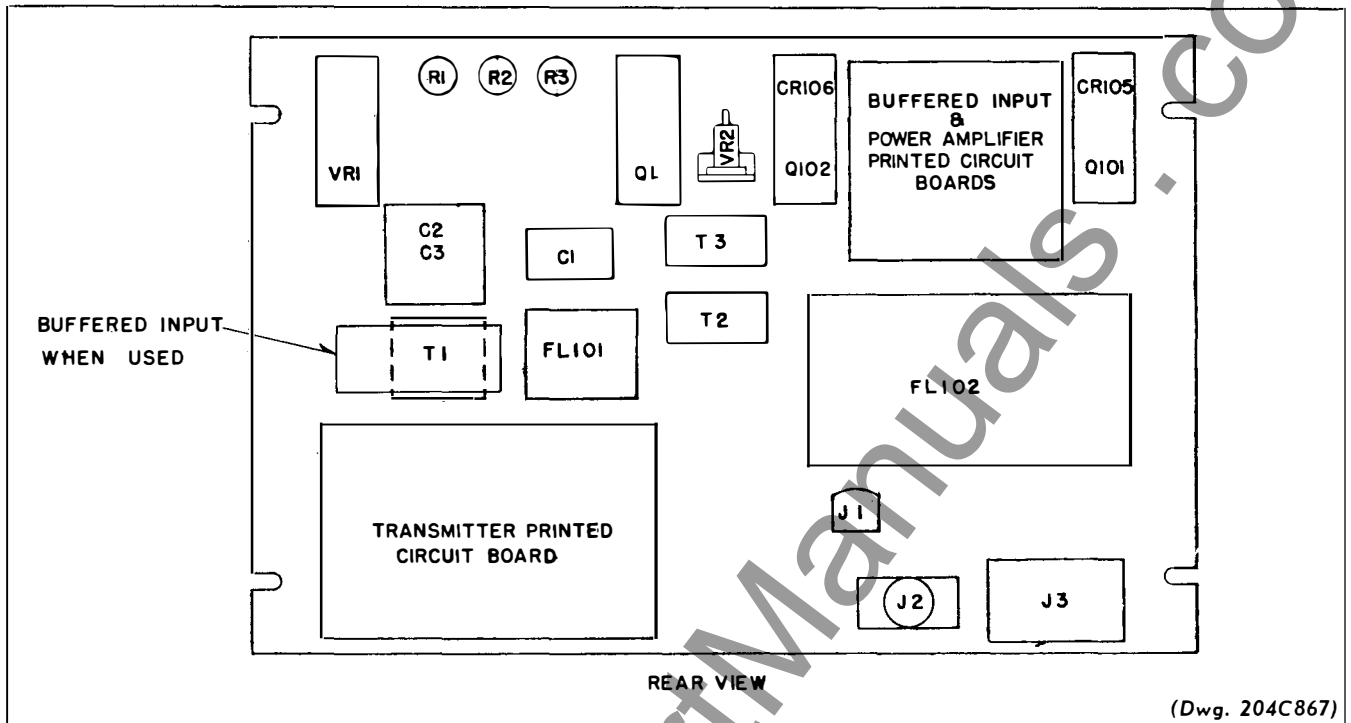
Component Locations of Type TCF Transmitter Assembly
